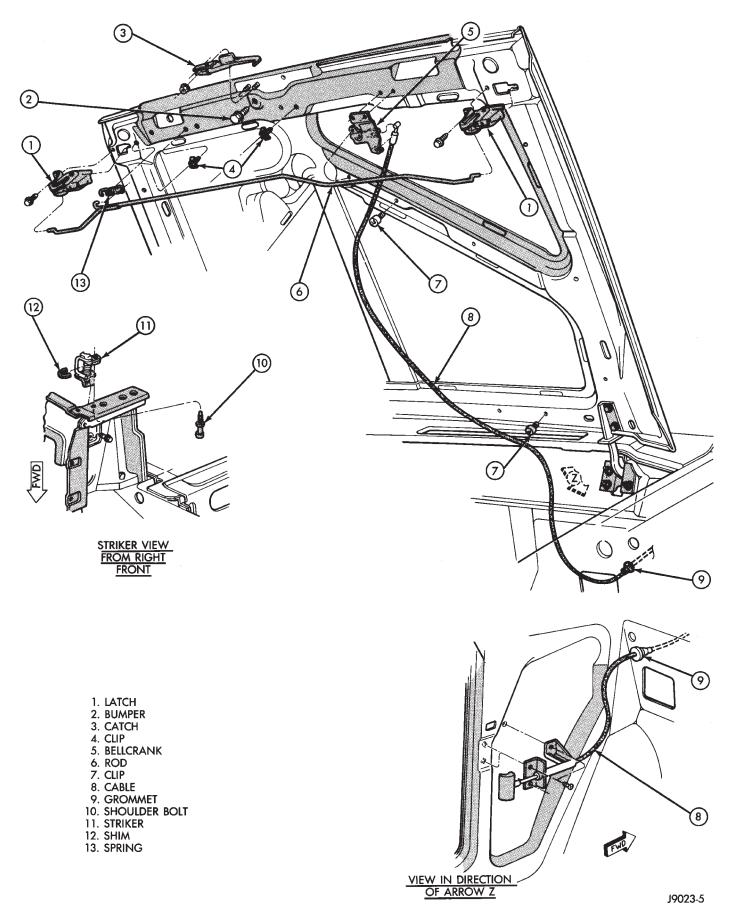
Hood Latches, Rod, Release Cable, Striker & Safety Latch
